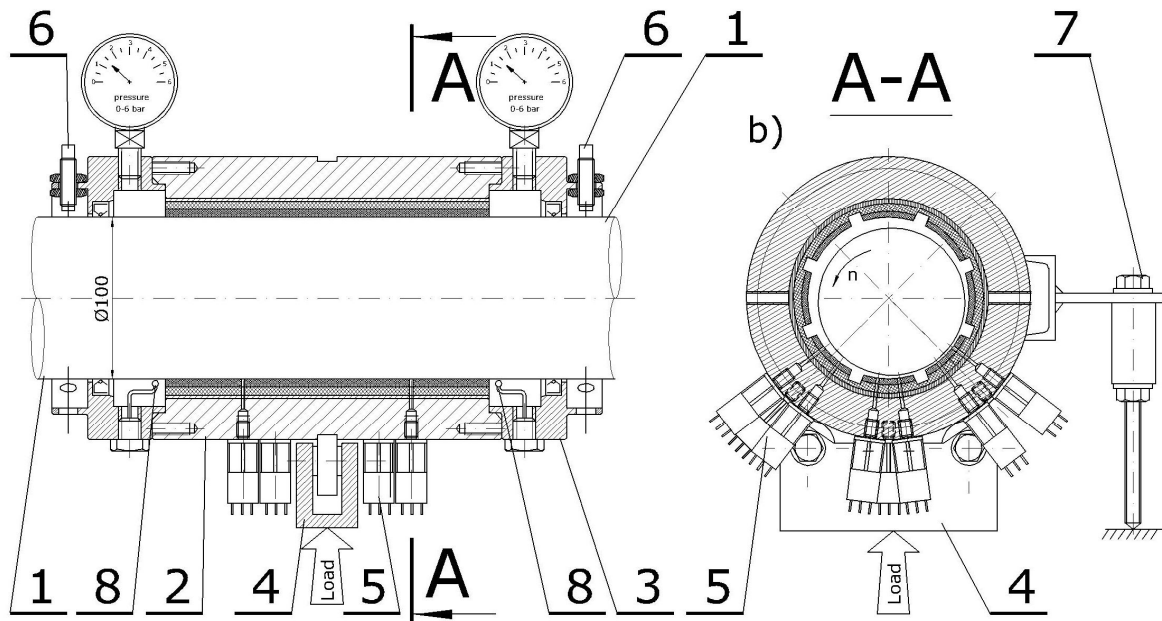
Tested bearing assembly - test rig; 1- stainless steel main shaft, 2- steel sleeve - bearing casing, 3- covers with sealing rings, 4- radial force application unit, 5- sensors measuring pressure between journal and bush, 6 – sensors measuring distance between journey and bush, 7- arm and sensor for measuring moment of friction, 8 - sensors of water temperature flowing through the bearing
